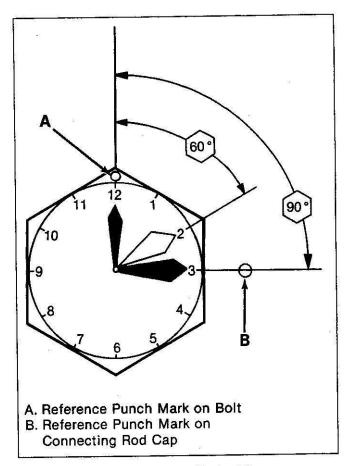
Angle Torquing Method for Connecting Rod Bolts
